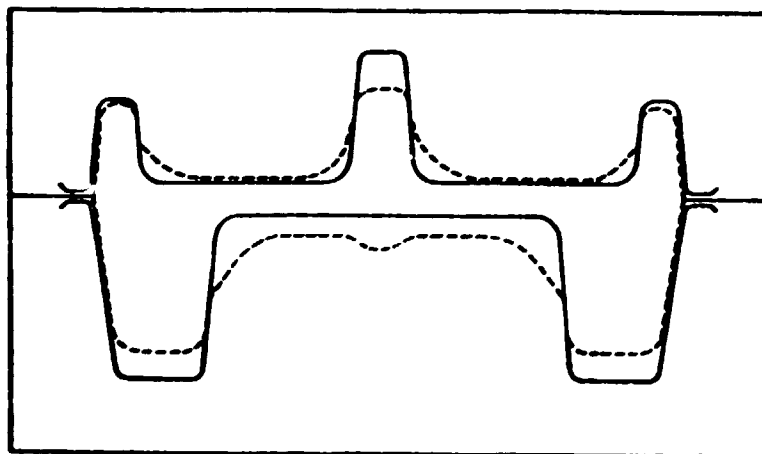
A typical forging cross section and a possible blocker design displayed on a computer terminal.
